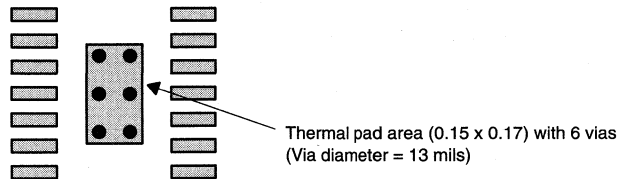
PowerPAD PCB Etch and Via Pattern – Minimum Requirements
